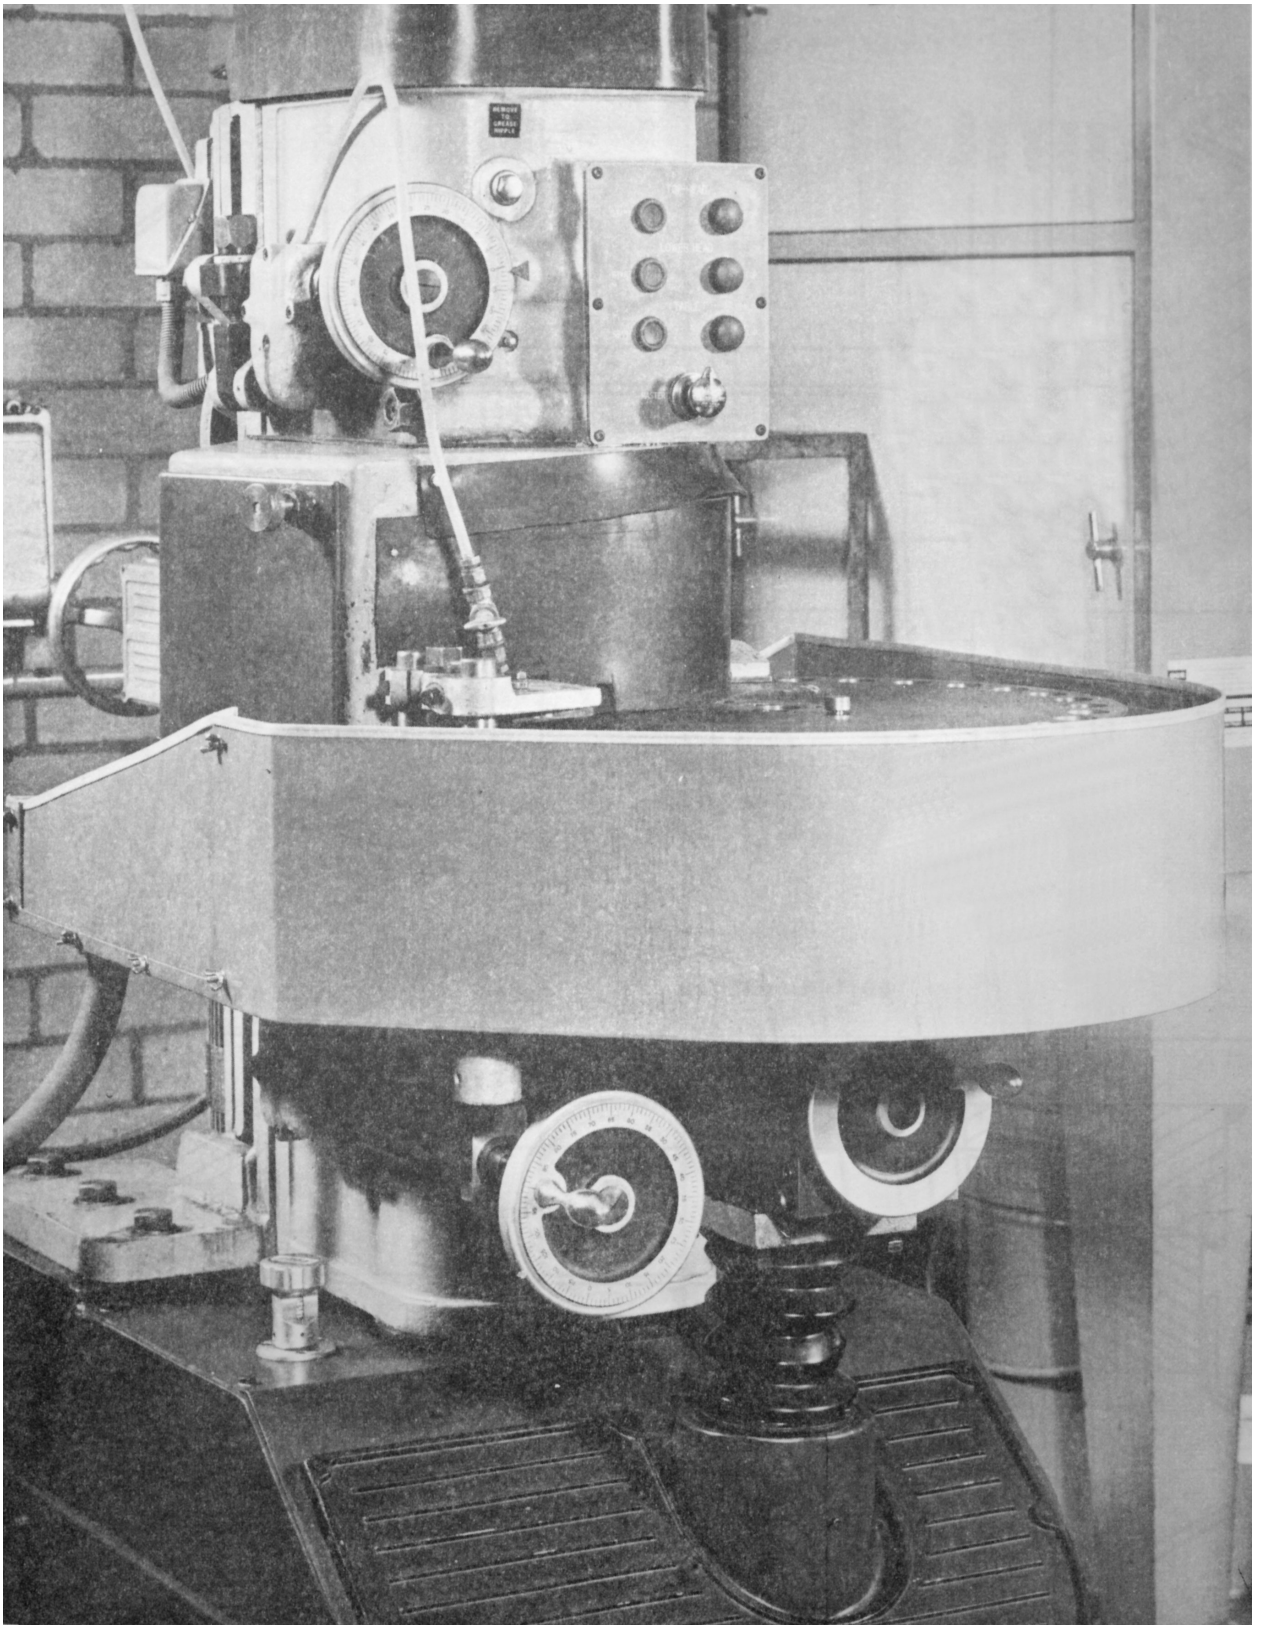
PHOTOGRAPH OF MODIFIED MACHINE SHOWING COLLECTING TANK
